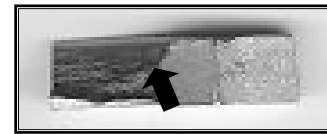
Specimen Used For SEM Fractography with the Location of Scan
